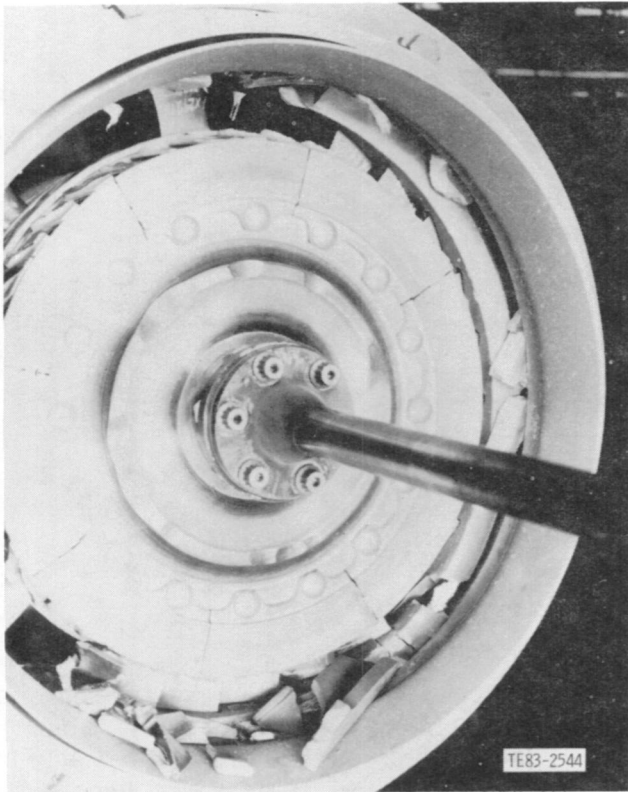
Gasifier turbine assembly, for engine C-4, TD14 (close-up view).
